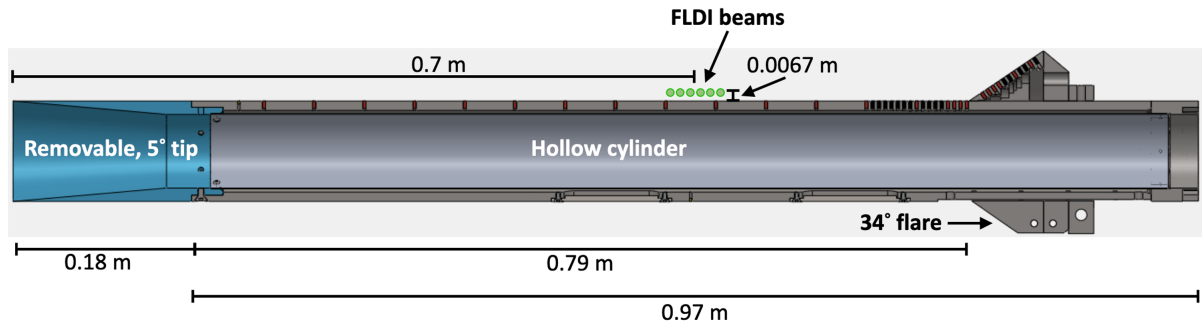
Section view of HCF showing removable 5° tip, hollow cylinder, 34° flare, and location of FLDI beams.
